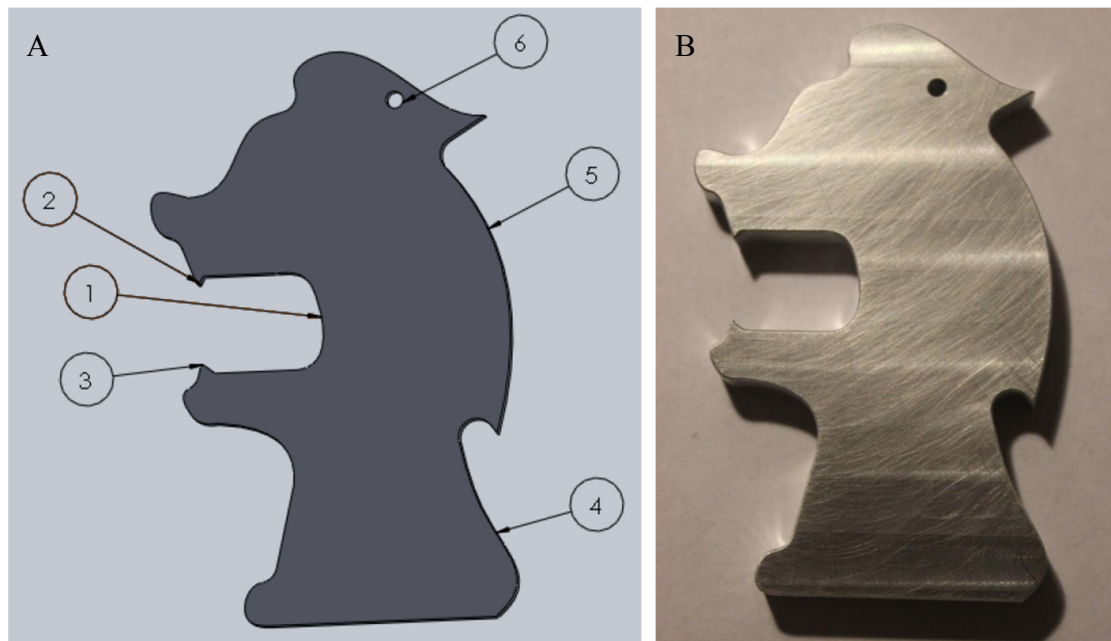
Figure I. One of the ‘winning’ bottle opener designs. A) 3D CAD image from the design intent document indicating various features, and B) the final CNC milled part.
